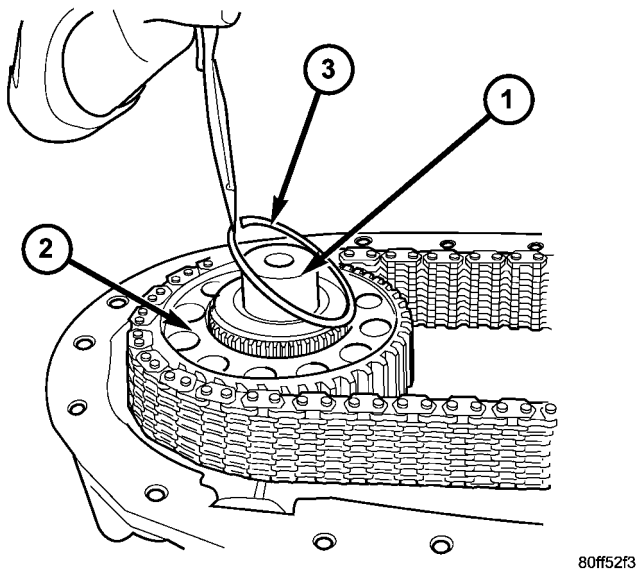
Install Front Output Shaft Sprocket Retaining Ring
